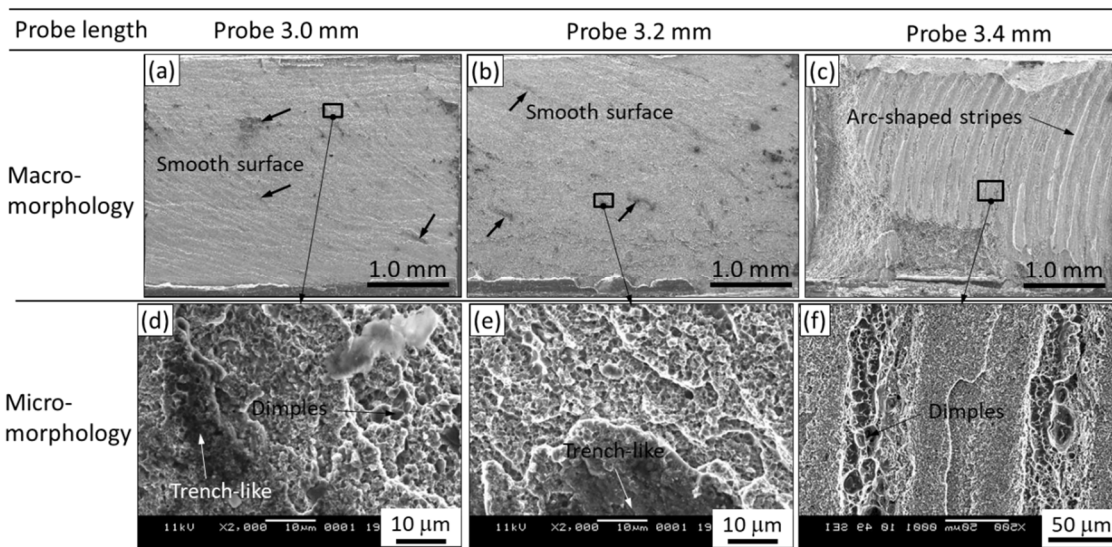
(a-c) Macro- and (d-f) micro-morphology of fracture surface of specimens produced by various probe lengths.
